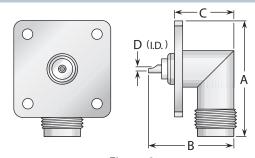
(Solder pot contact, 1" square flange, interchangeable with type N standard flange size)
